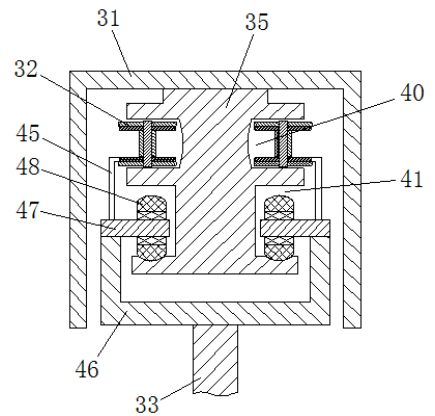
Structure diagram of the Cross section of n-shell, front rail and boom fit on front rail
